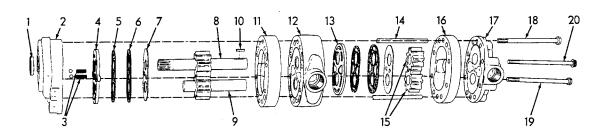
Transmission Oil Pump Parts (HD6EP Eff. S/N 18754 and Up, HD7G Eff. S/N 24276 and Up) (T-71382)
